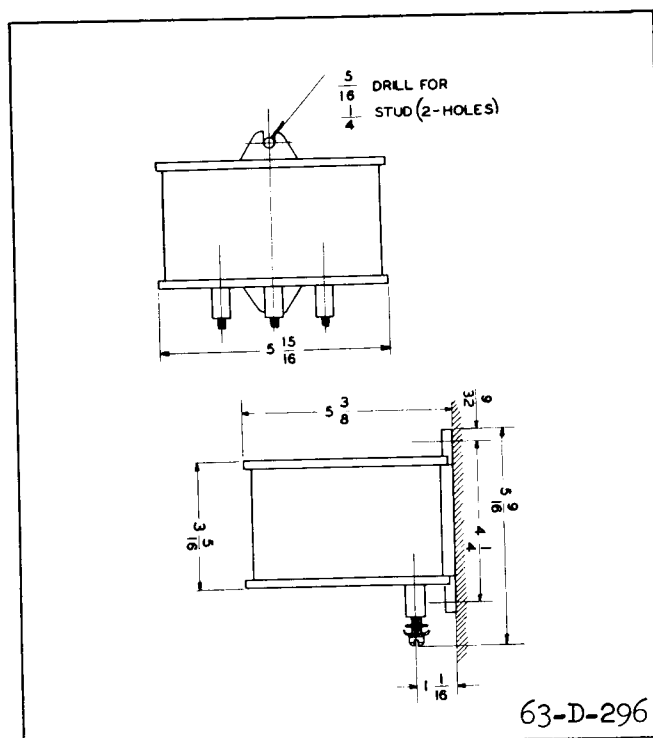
Outline and Drilling Plan for External Phase Shifter Used With HCR for Ground Fault Protection.
